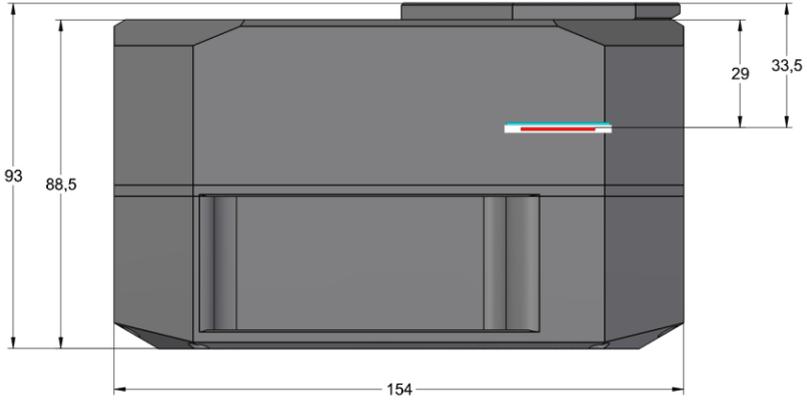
C3 camera head with Enhanced Cooling and Internal Filter Wheel side view dimensions
